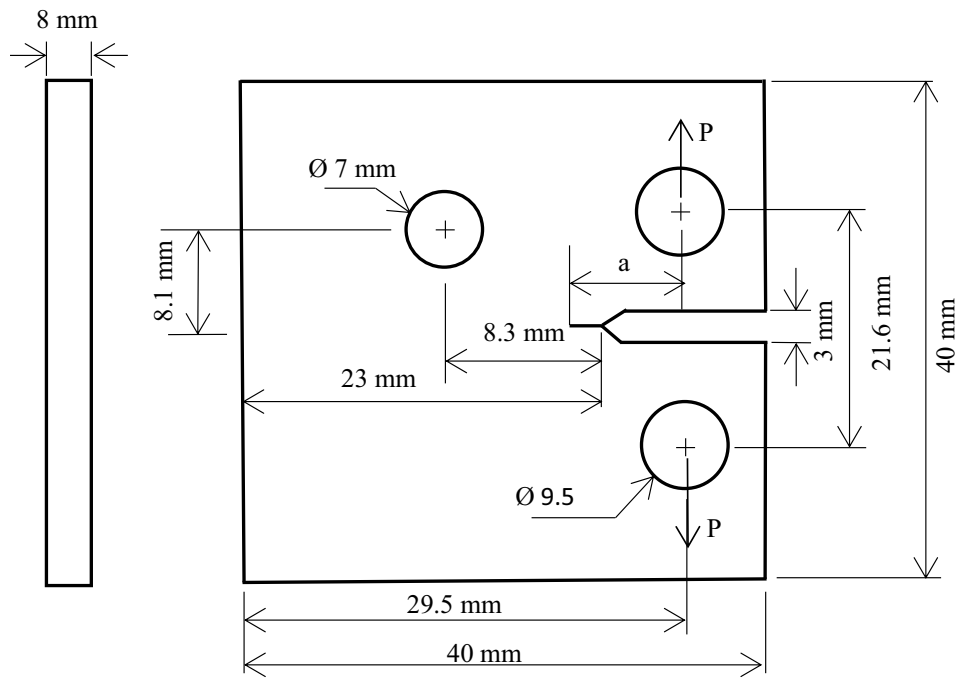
Geometrical dimensions of SAE 1020 modified CT specimen [54].
